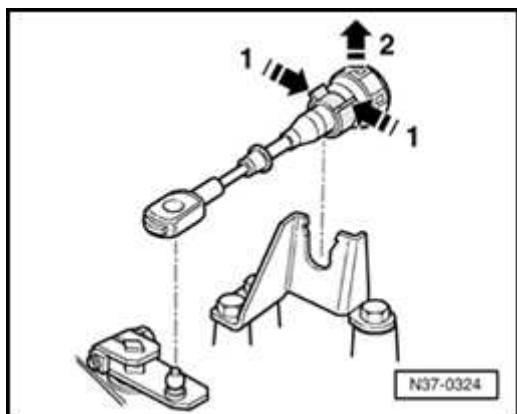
Identifying Cable Disengaged And Removed From Mounting Bracket
